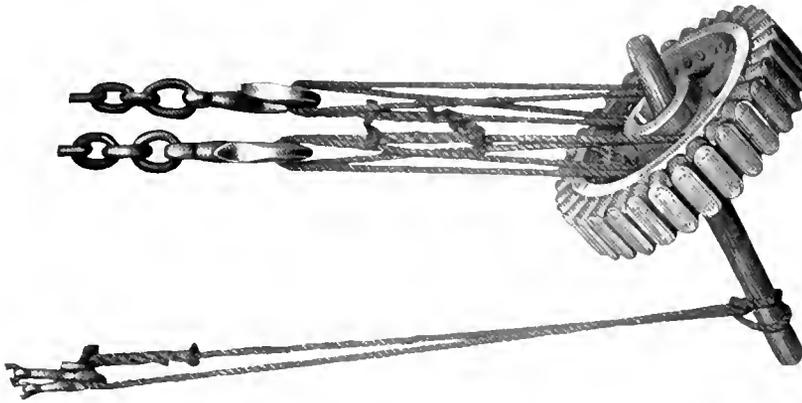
Proper Way to Lift and Turn Revolving Field (Second Position)
